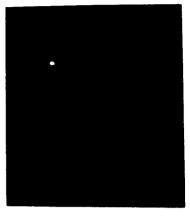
Reproduction (5X) of a radiograph of a resistance spot weld with a 0.003 inch nickel foil insert. This spot weld (No. 2) was located in a weld test panel (No. CP61B) and represents the as-welded condition (not stressed). This is the same panel discussed under Figure 13. Note the dark line image at the top inner periphery of the light halo image.
